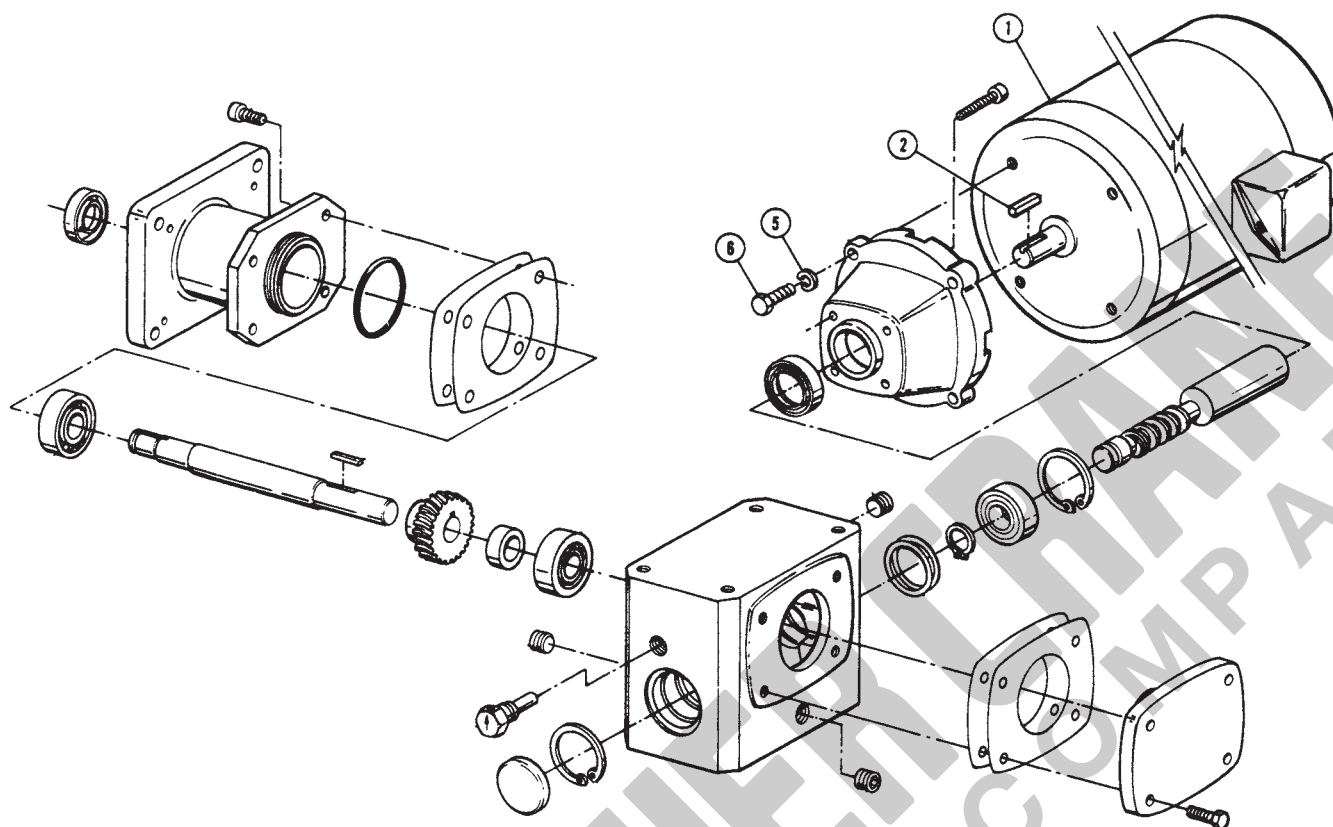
Motor and Gearbox Assembly (3-1/8" & 5" c/c Pins)
